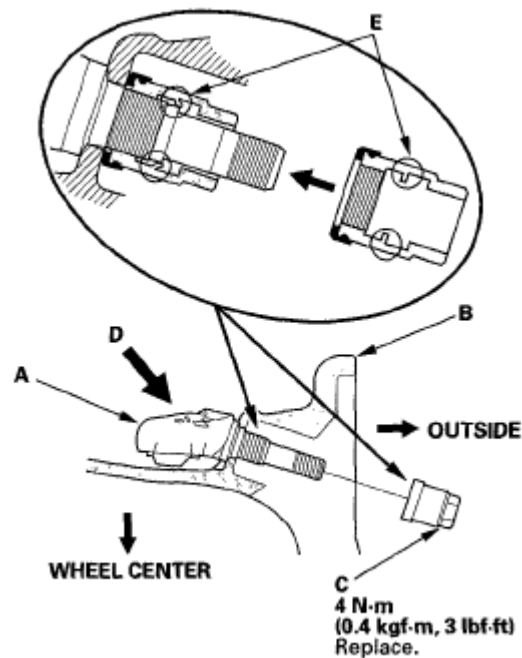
Installing Tire Pressure Sensor To Wheel With Torque Specification
